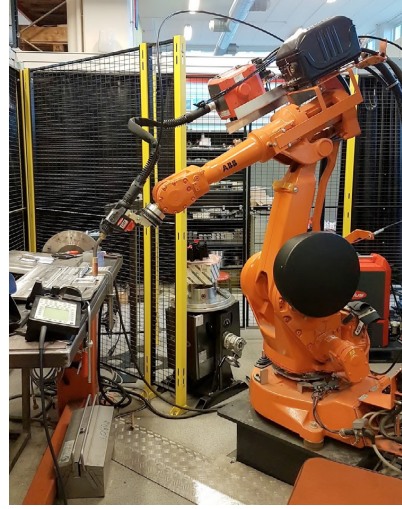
Experimental set-up: 6 DOF ABB IRB2400/10 robot manipulator with welding equipment from Fronius.
